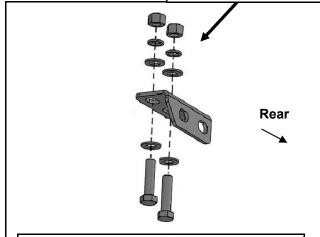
Reuse factory hardware to attach driver/left Bumper Bracket and hitch to side of frame
